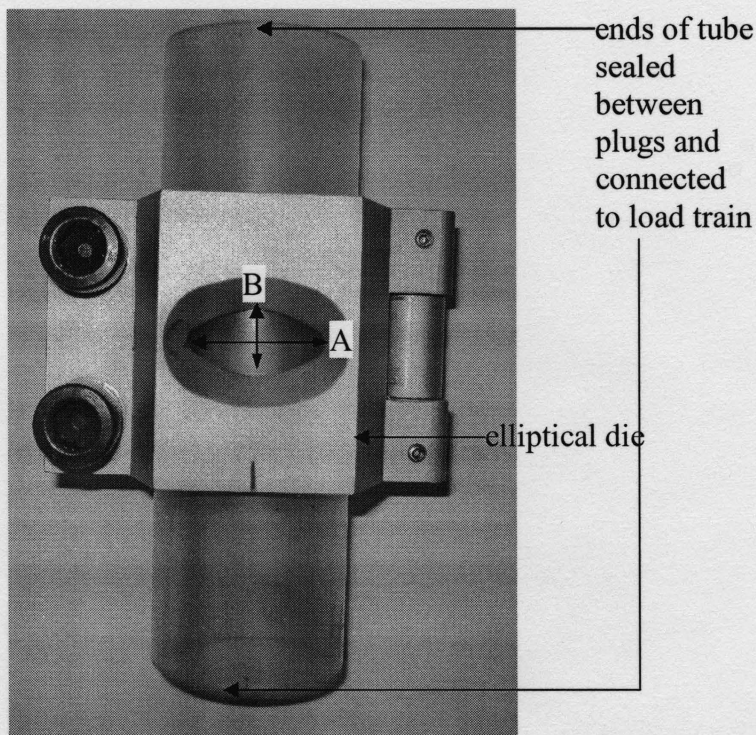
Elliptical die used in tube forming test showing major and minor axis, A and B respectively.
